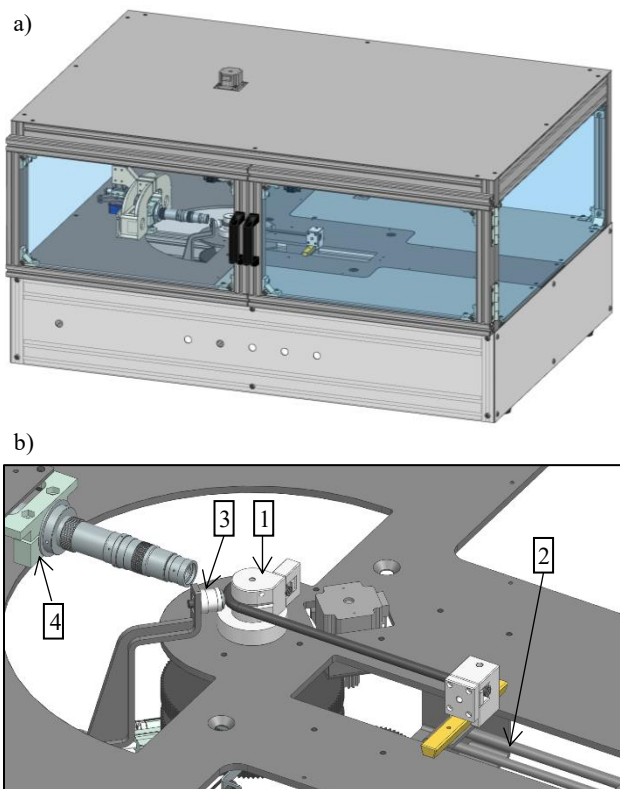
a) Model view of the Cable Bending and Rubbing Machine. b) Model view of the main modules and components. The cable bending and tensioning module consists of (1) the bending wheel and (2) the tensioning component to which the cable in black is attached. (3) The abrading part of the rubbing module. (4) The camera (imaging module).
